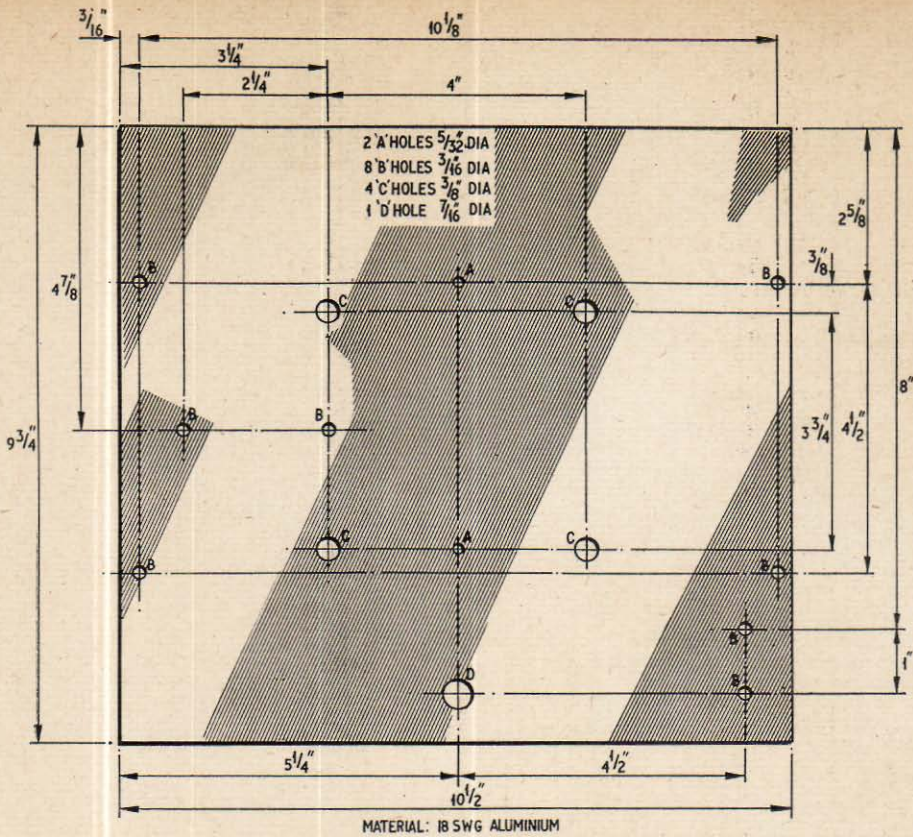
(above). Drilling details of the aluminium panel to hold the potentiometers
